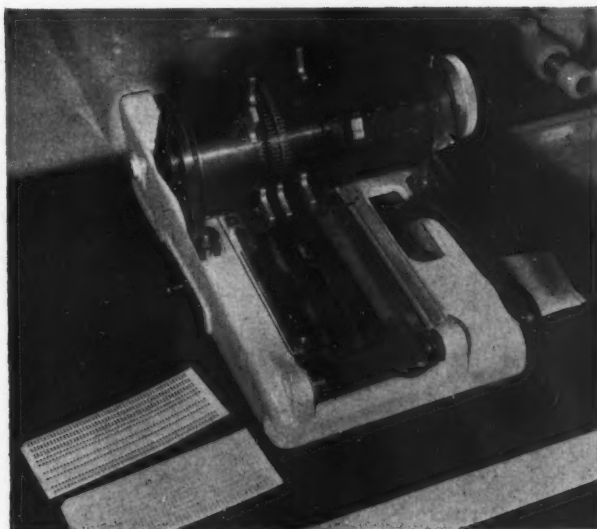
Close-up view of the card punching unit, also seen at the extreme right in Fig. 1, for preparing the cards to be used on the boring machine. A card, held in a carriage, is indexed by means of a key, and punched by depressing the lever
